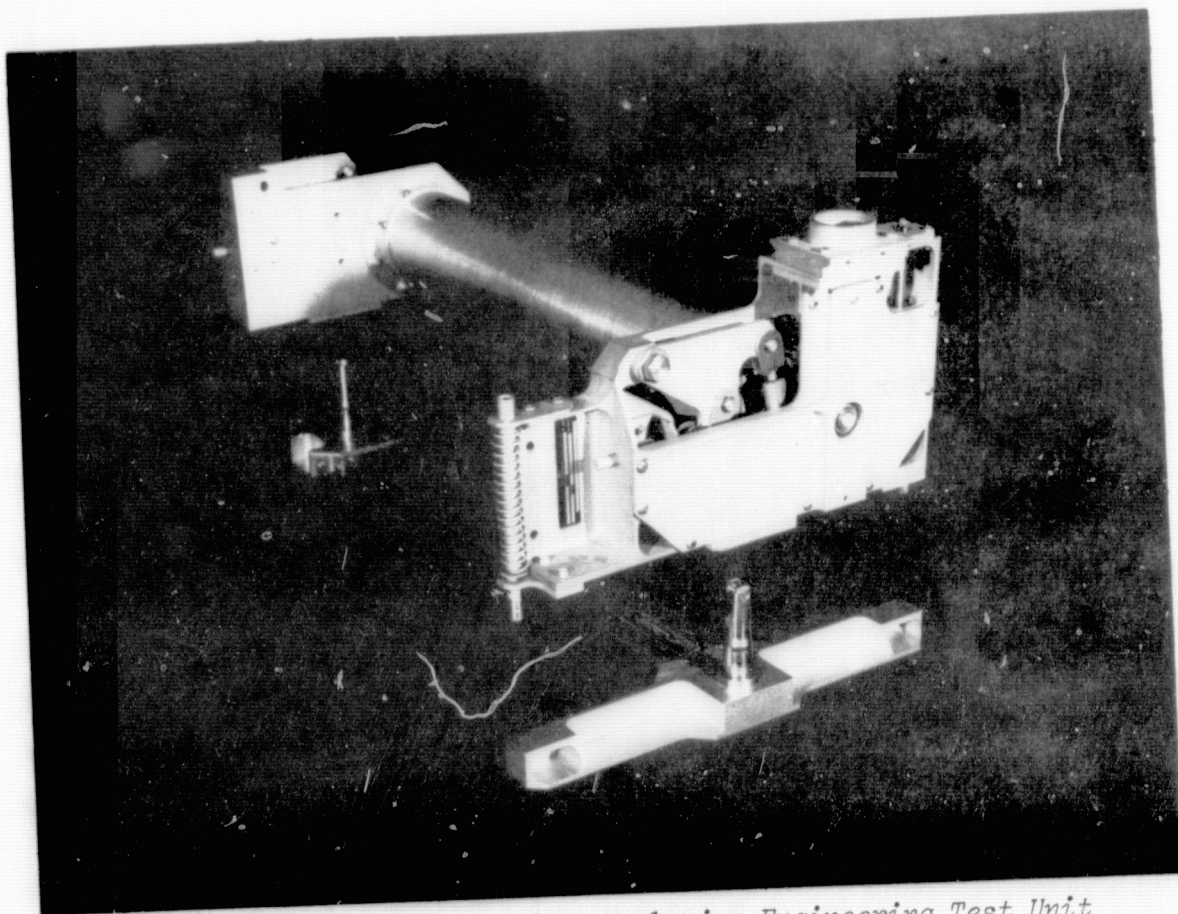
Bottom-Mounted Interface Mechanism Engineering Test Unit
